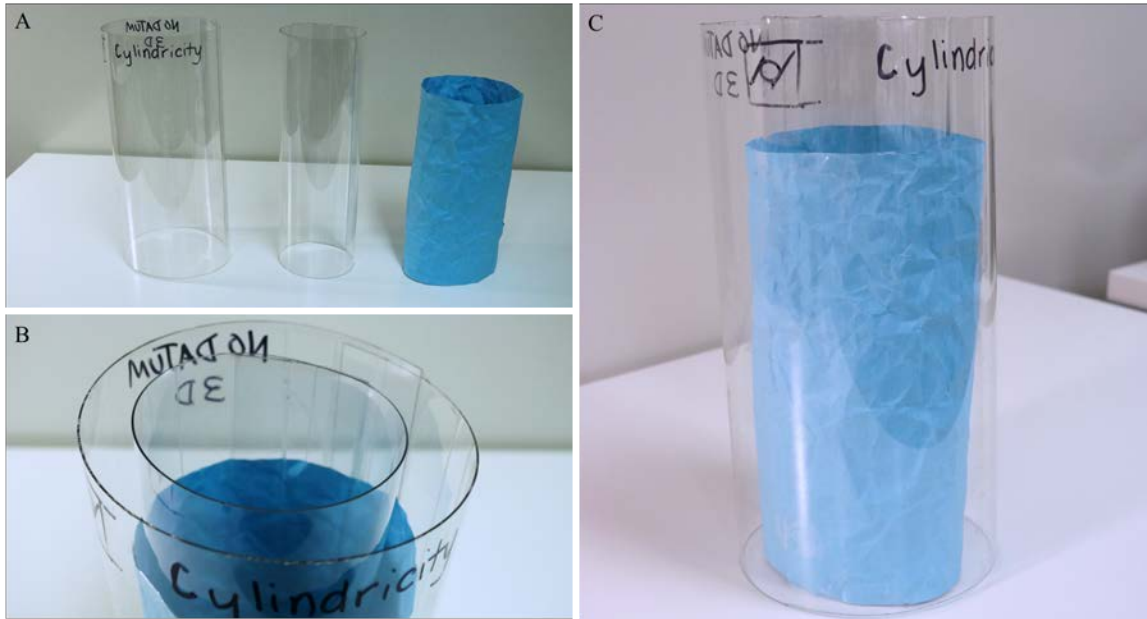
GD&T Spatial Learning Tool for Cylindricity Tolerance
